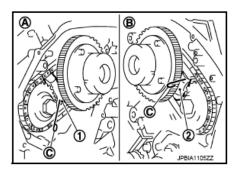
Tightening Camshaft Sprocket Mounting Bolt Using Tool Courtesy of NISSAN NORTH AMERICA, INC.
